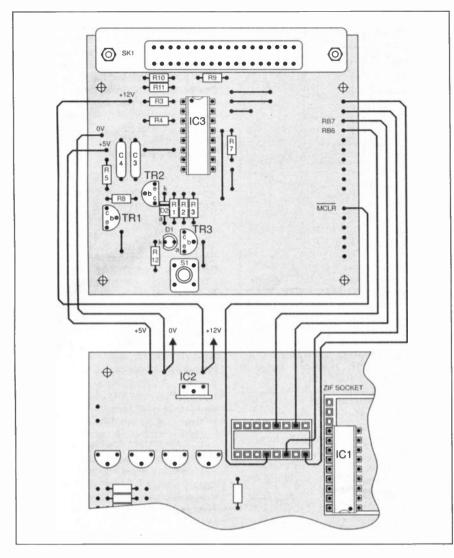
Component layout and interconnections when Toolkit is used with the PIC Tutorial p.c.b.
